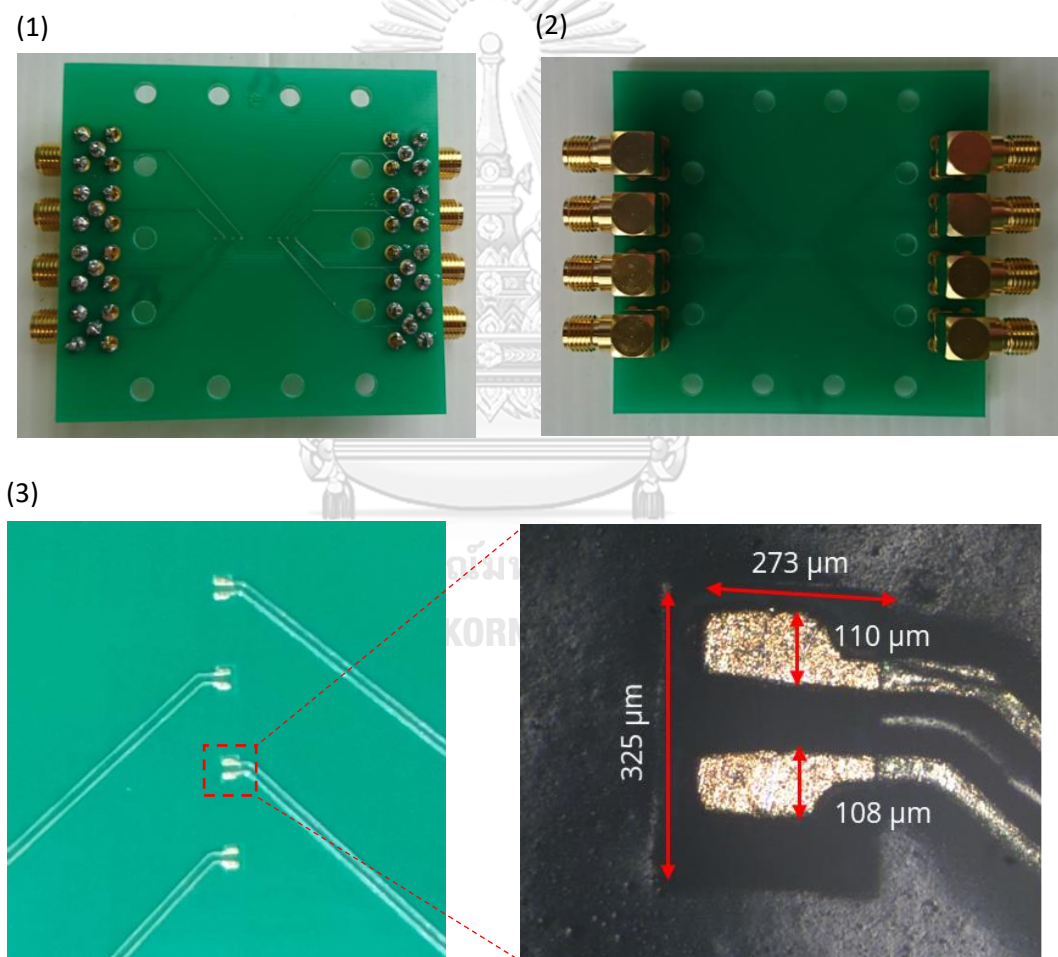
The PCB. (1) Front of PCB. (2) Back of PCB. (3) Size of Electrode.
